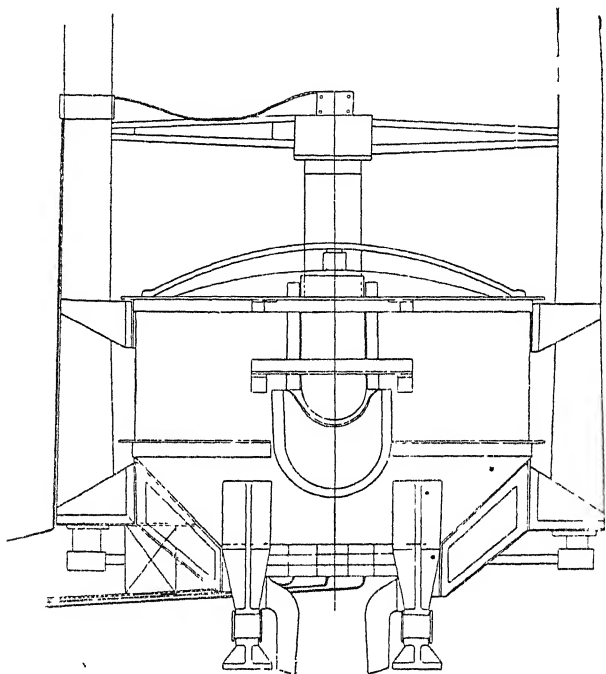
SECTIONAL ELEVATION OF 2.5-TON GIROD ELECTRIC FURNACE.
